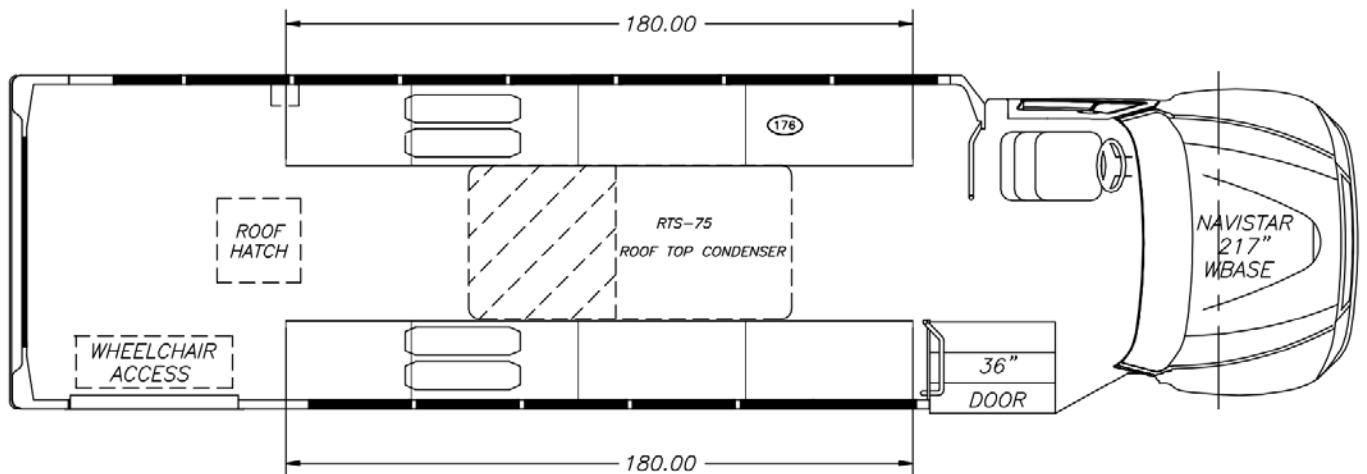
Current International El-Dorado Floor Plan. Wheelchair access door would need to move to back of bus to accommodate loading surf boards
